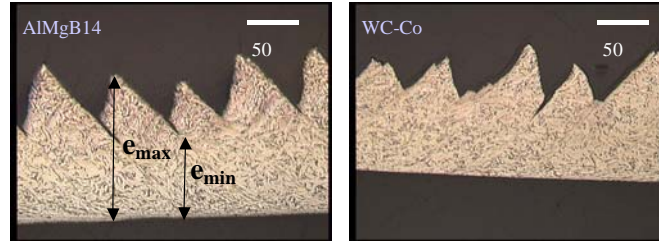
Optical microscopy of a chip section obtained for both cutting tool materials
